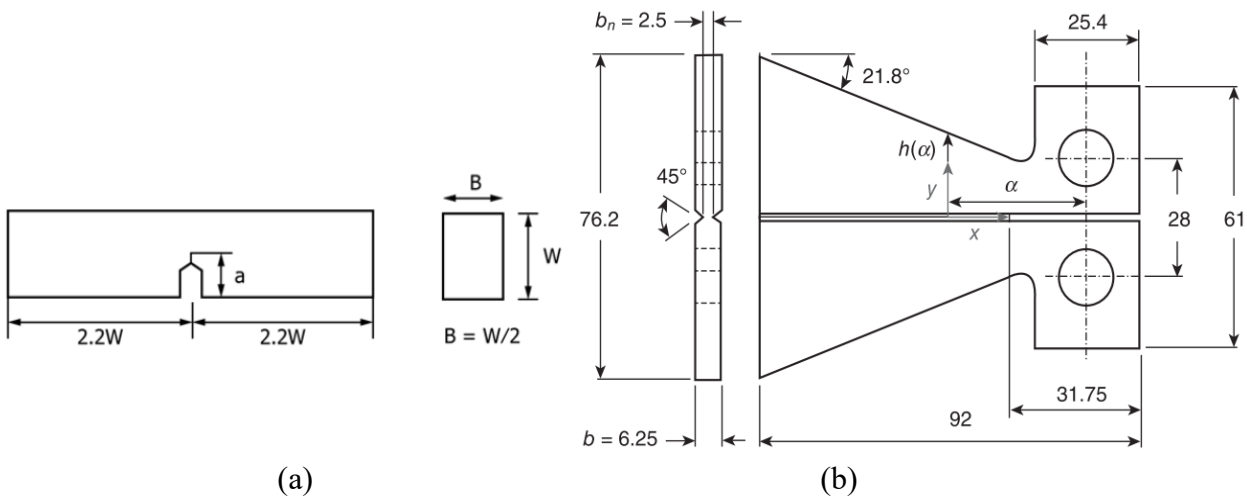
Test specimens configuration of epoxy polymer: (a) SENB [101] and (b) TDCB [102].
